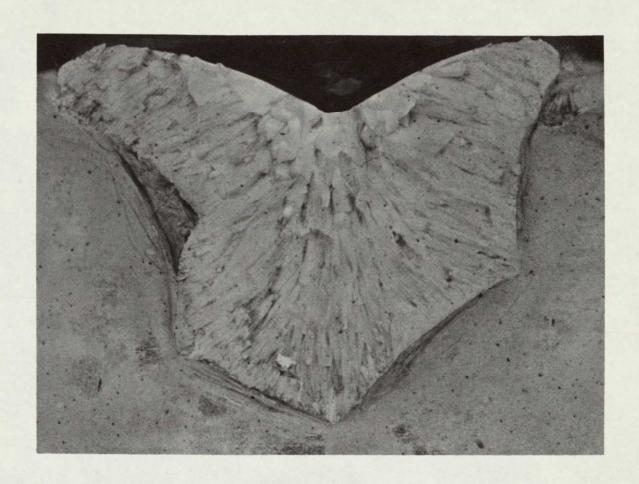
Fusion Spot-Weld Test of Cathodically Cleaned Sample Showing Heavy Oxide Folds.
